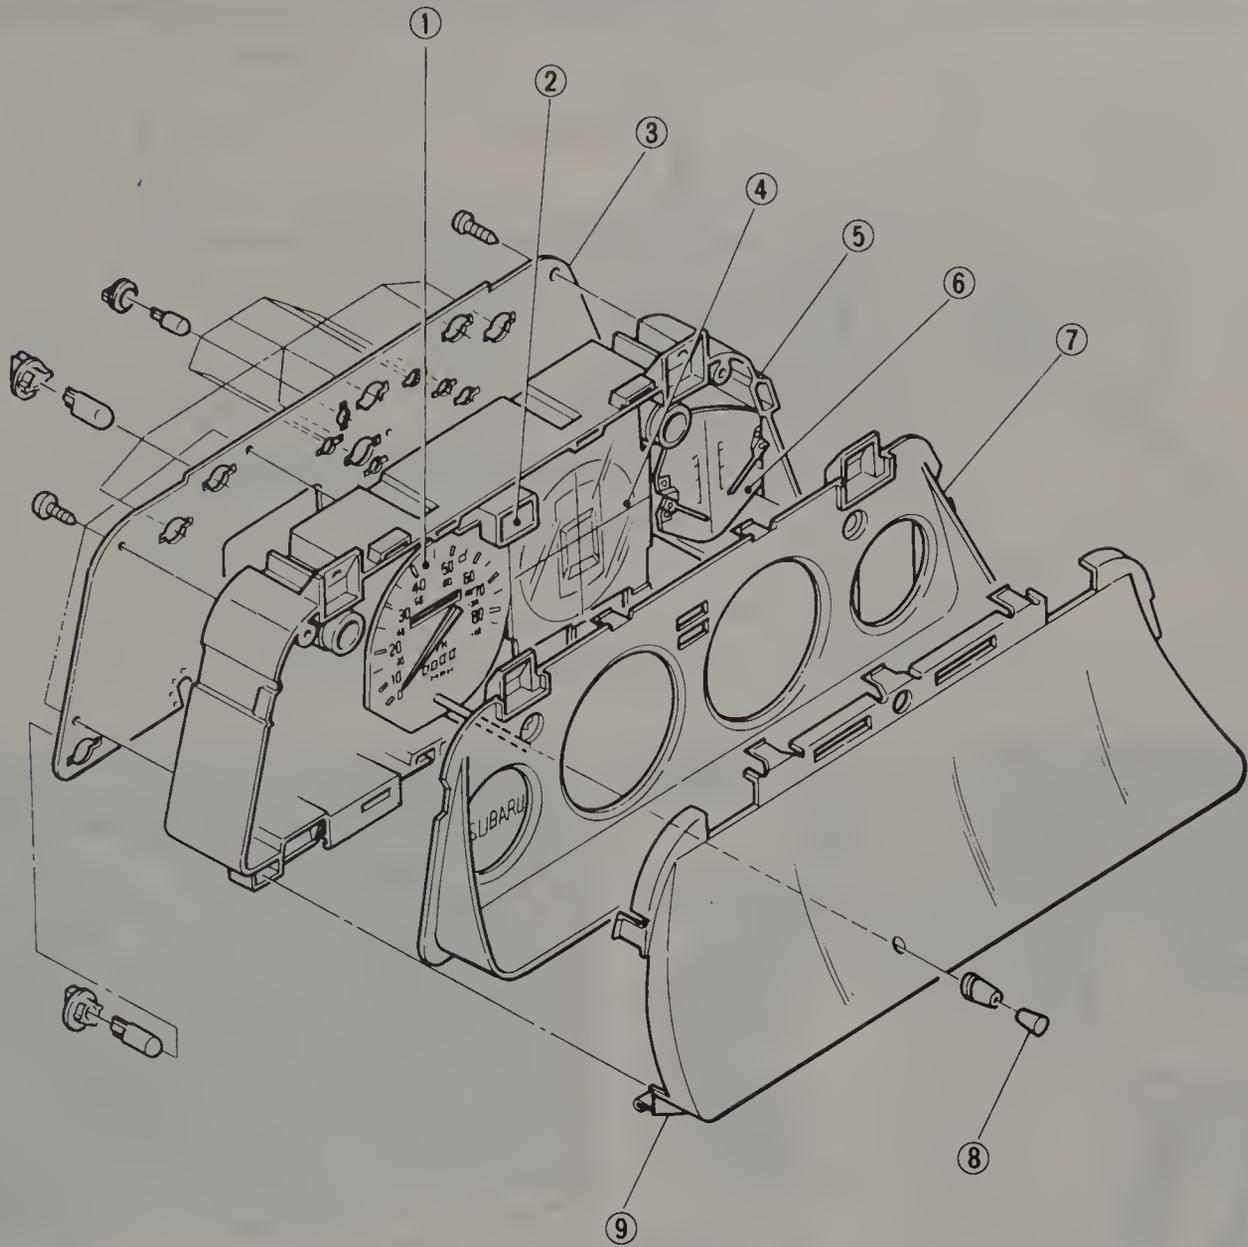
Conventional combination meter components – exploded view (Sec 6)
